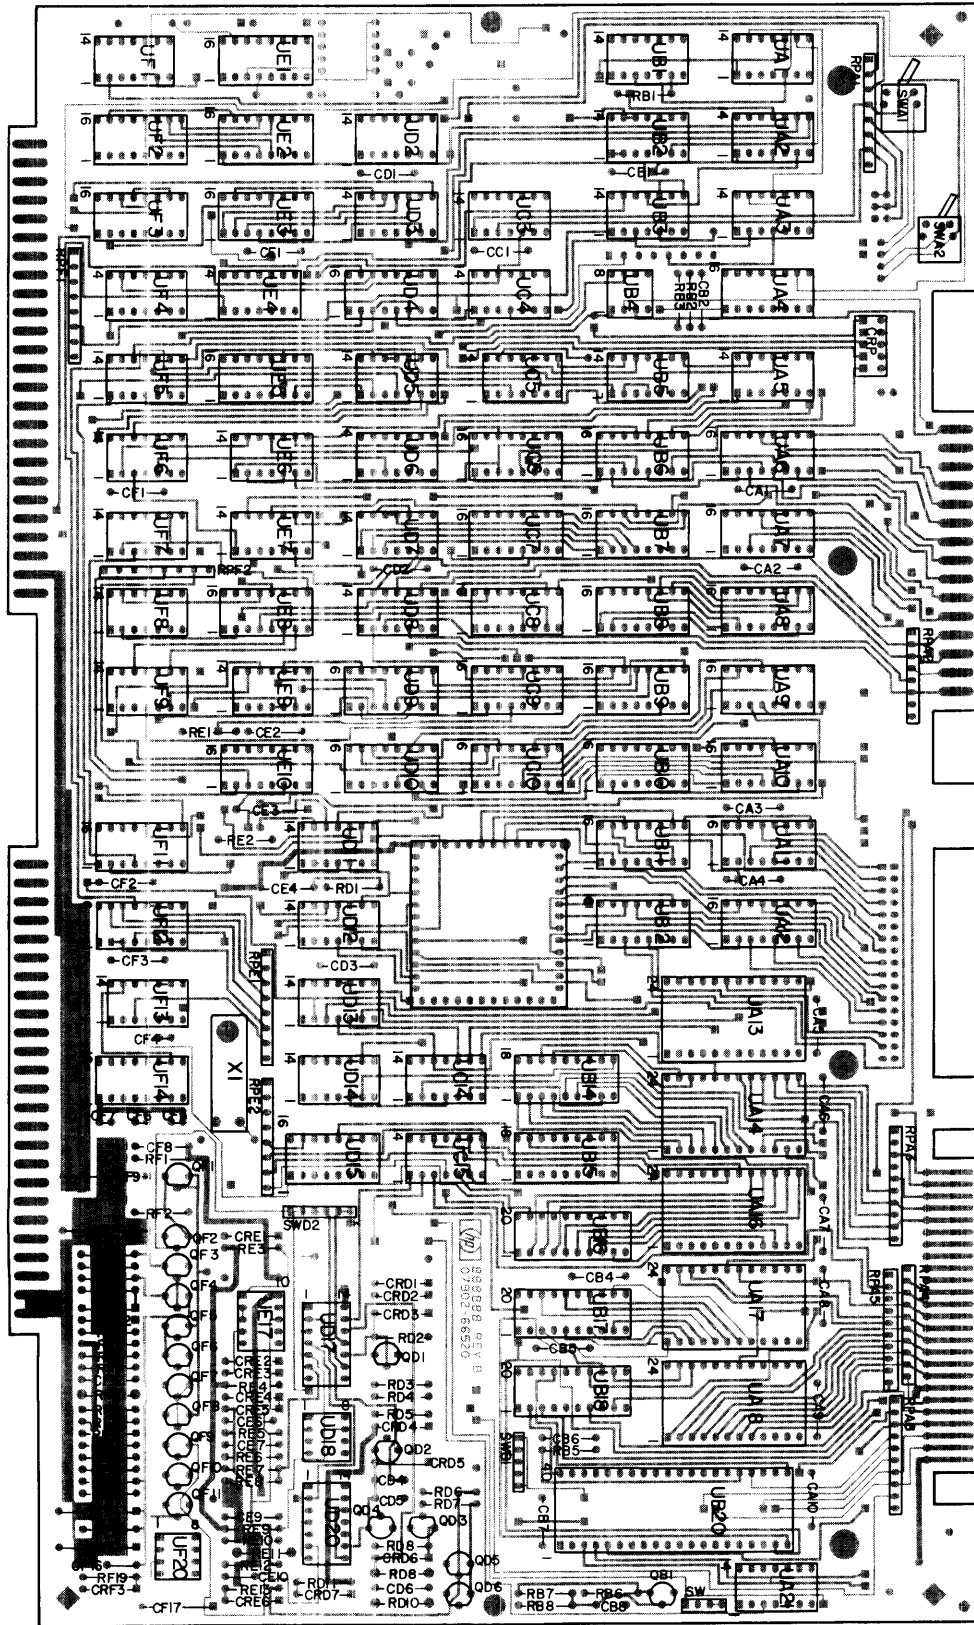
Controller Board A1 (07902-66520) Component Locator
